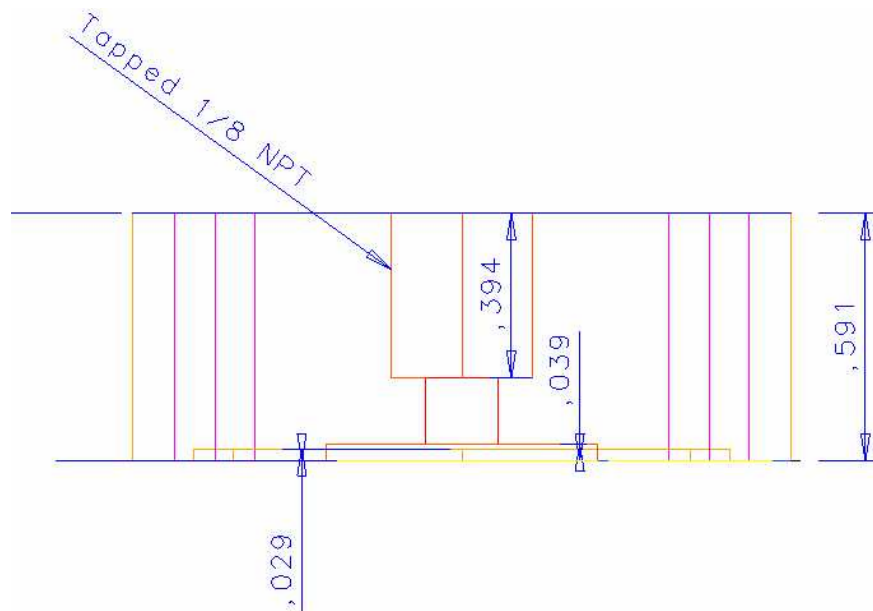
Inlet Valve Cover (Dimensions in inches)
